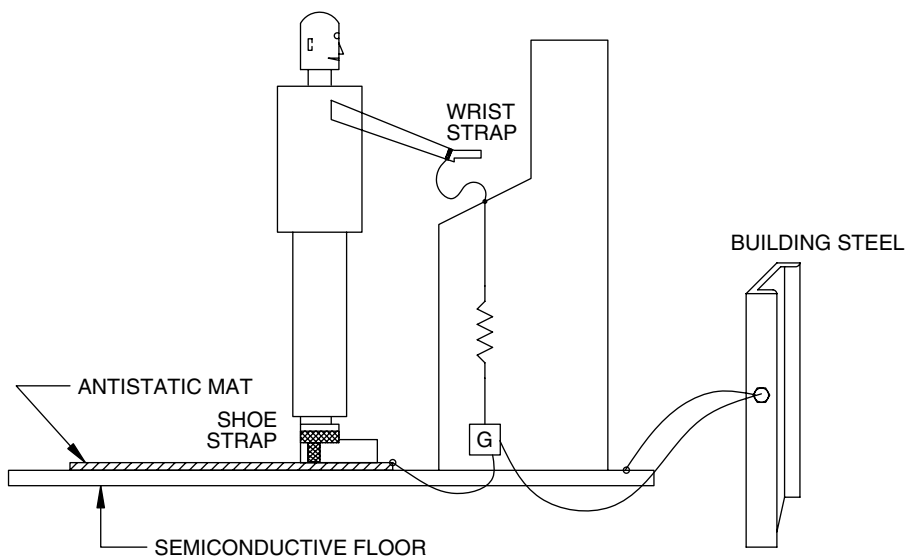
Static-protective workstation setup showing the use of a wrist strap, a shoe strap, and an antistatic floor mat.
